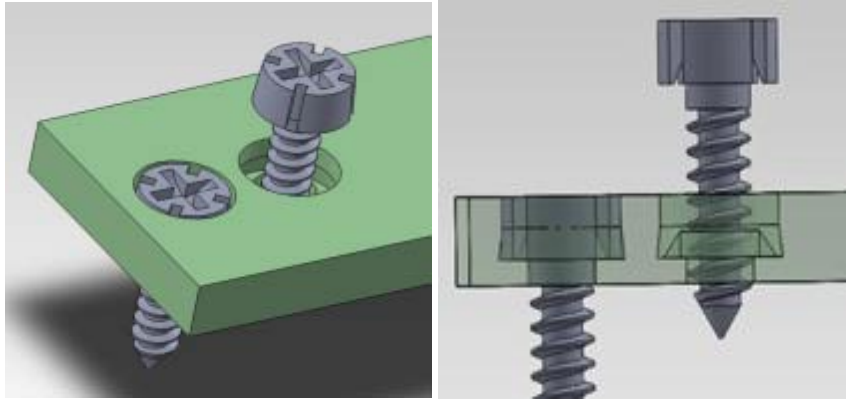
SolidWorks 3D Screw-Plate Assembly (Solid and Opaque)
